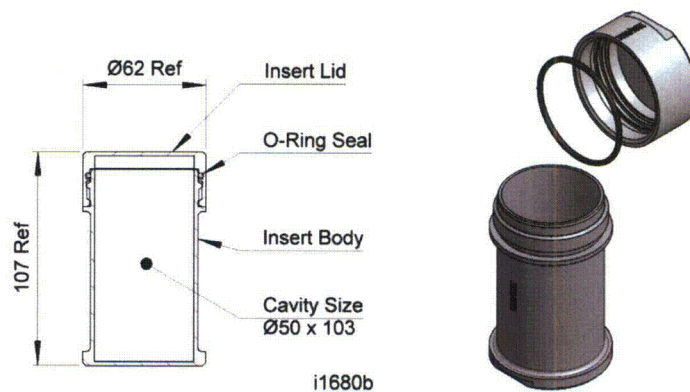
Shielding insert LS-50x103-SS – Design # 3986
